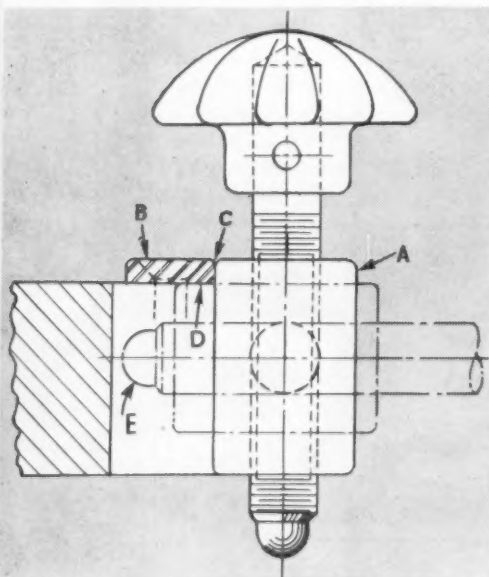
Drawing of a clamping arrangement in which the clamping screw is capable of being readily swung 90 degrees.
